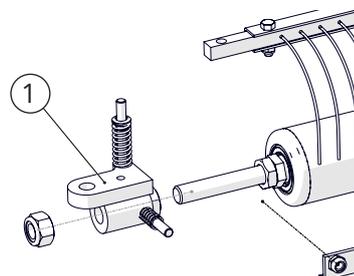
C - Remove comb tine and scraper to gain access to end block (1).
